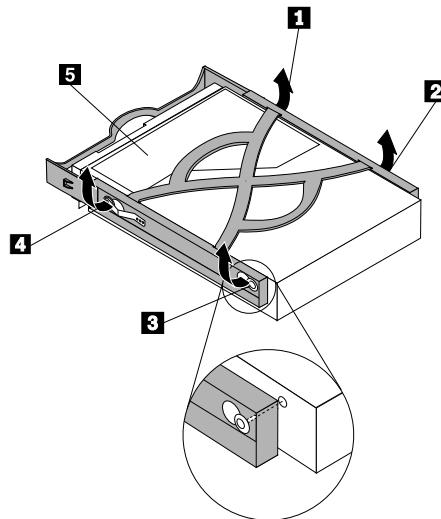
Installing a 3.5-inch hard disk drive into the bracket
